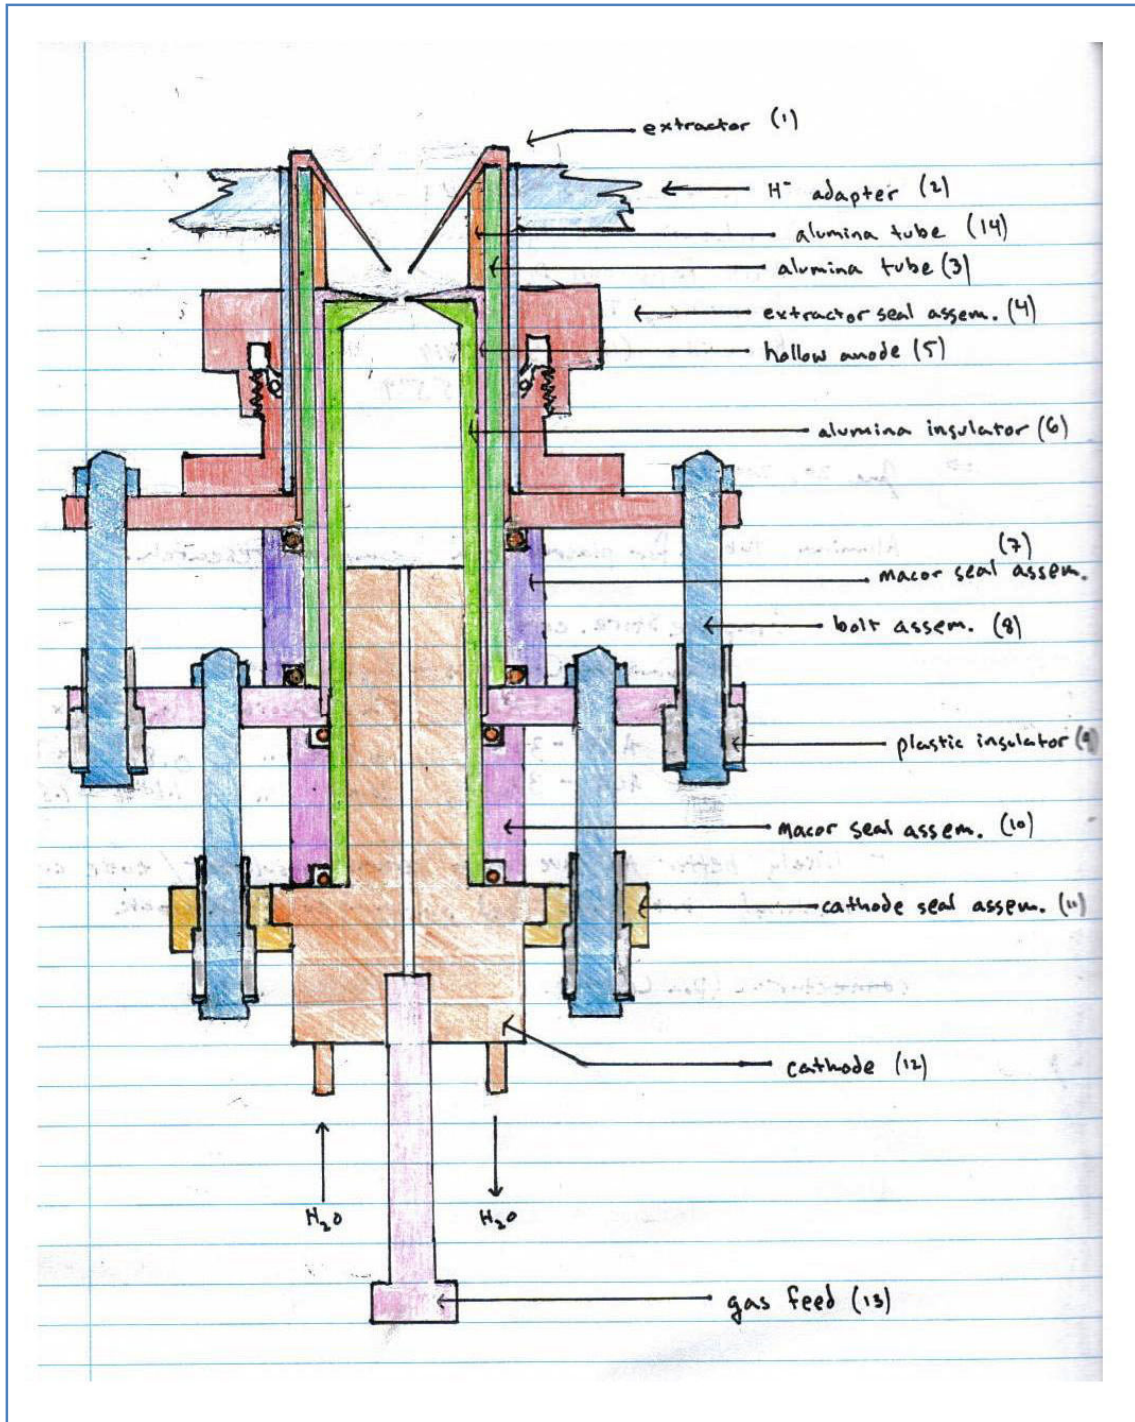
The first design concept, showing an extractor (1), insulated using custom machined alumina parts (2, 3, 6).
